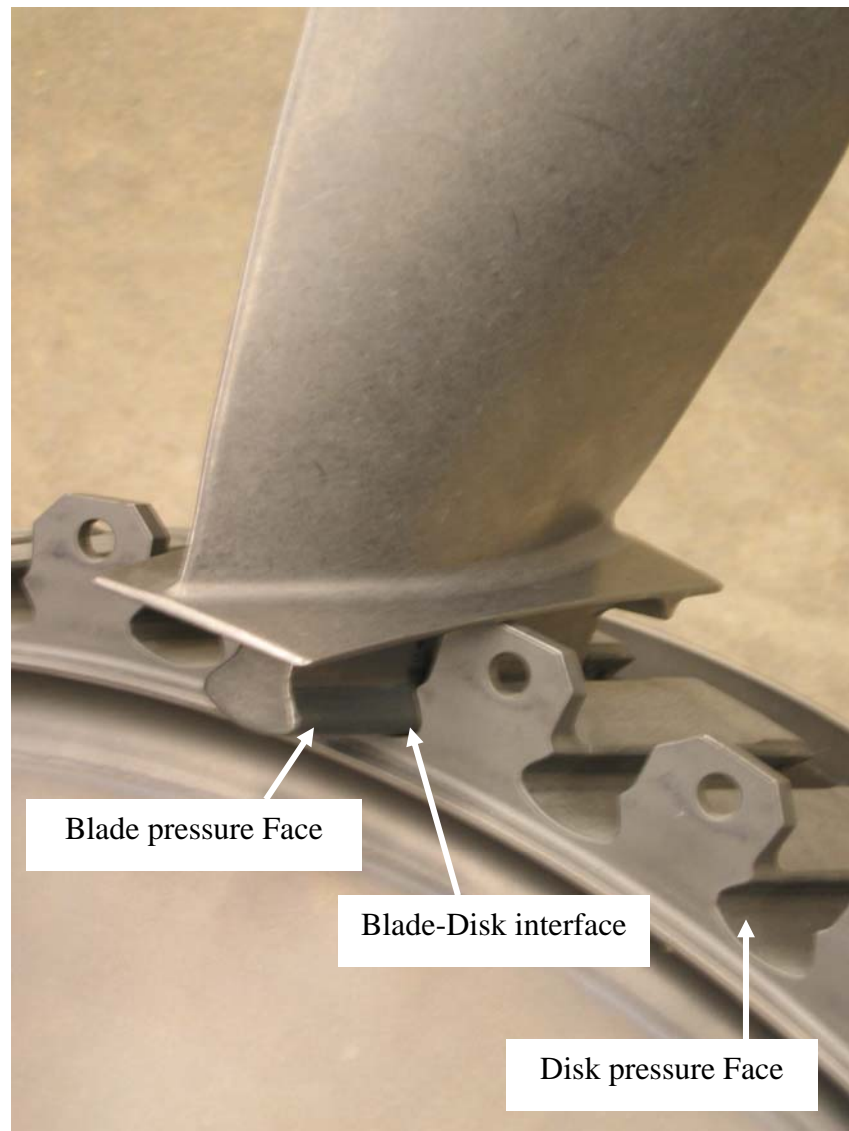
Blade/Disk Dovetail Joint in a Turbine Engine.
